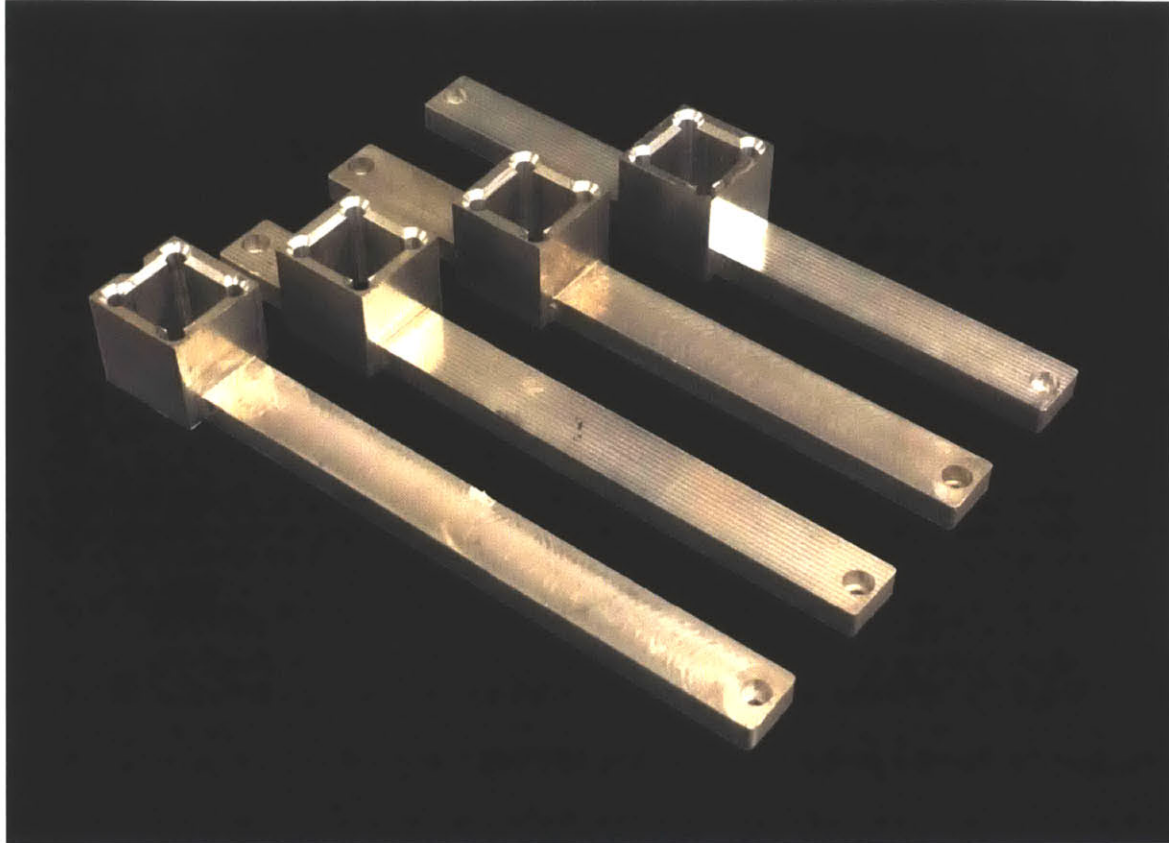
Photograph of fixtures for magnet guidance during insertion.
